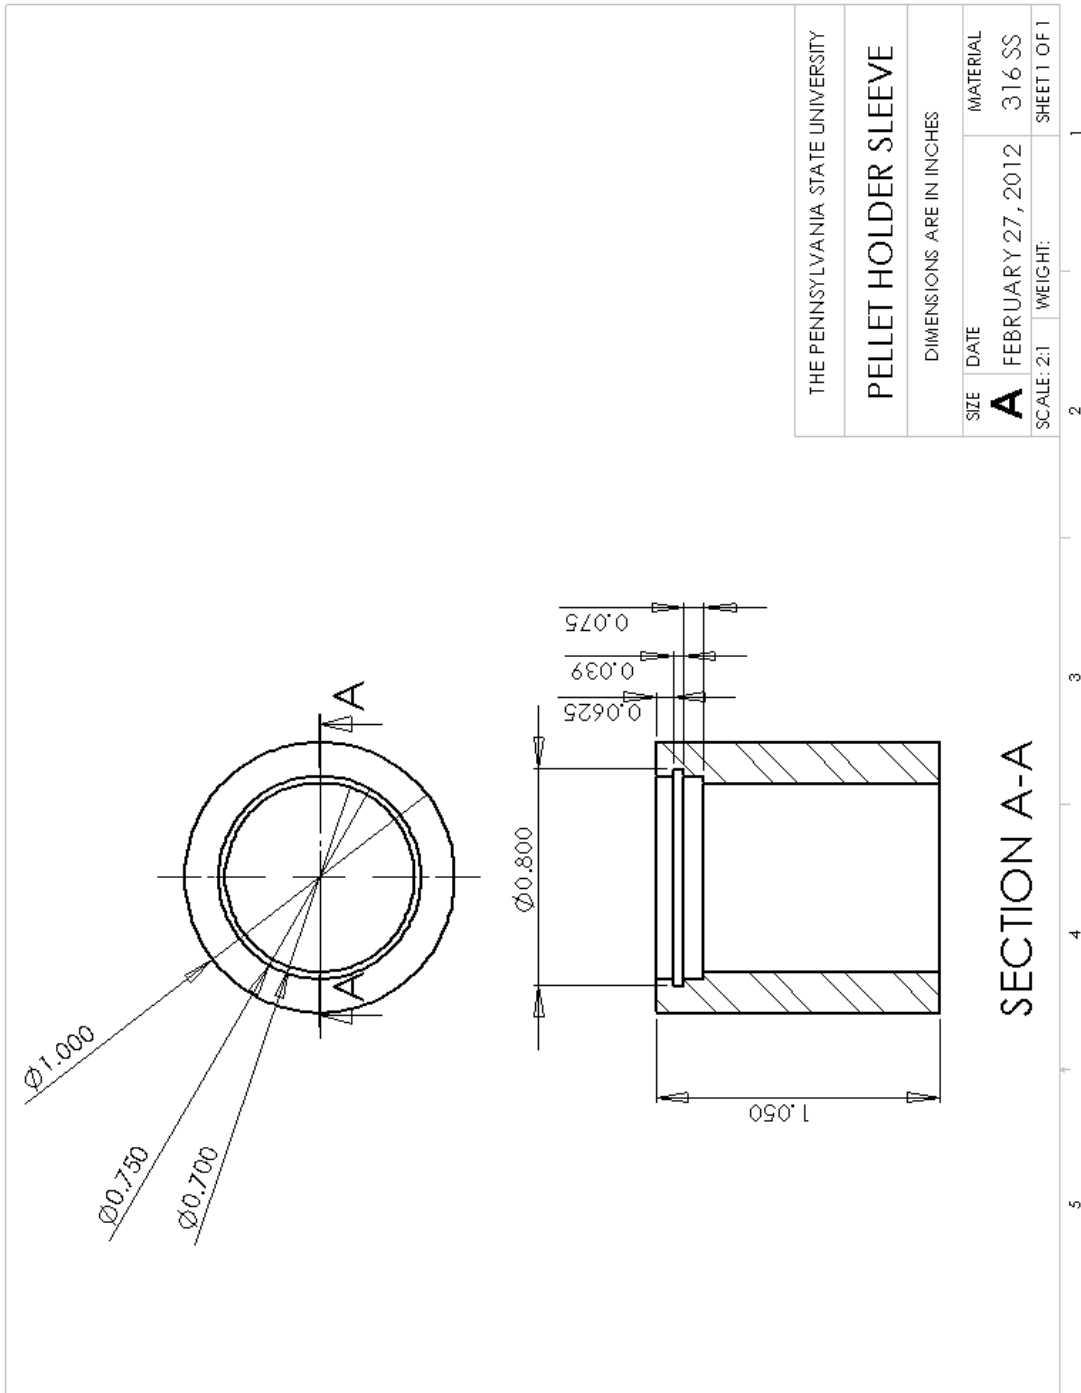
Drawing of sleeve component of pellet holder base for the pressurized counterflow burner
